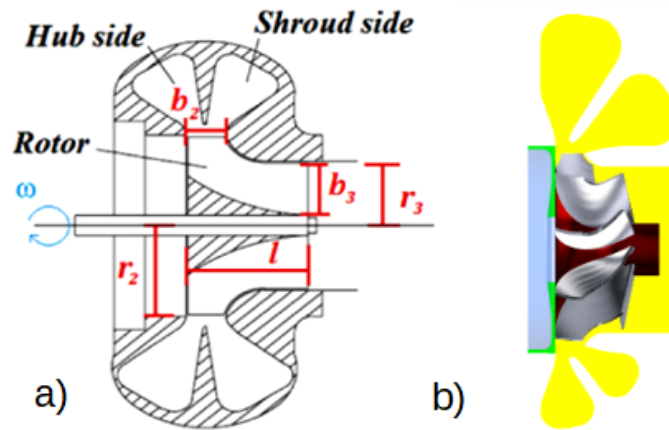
a) Sketch of the meridian section of a generic twin scroll turbine. b) Rotor view with a yellow cut of the volute and rotor passage, while the backside cavity is in green
